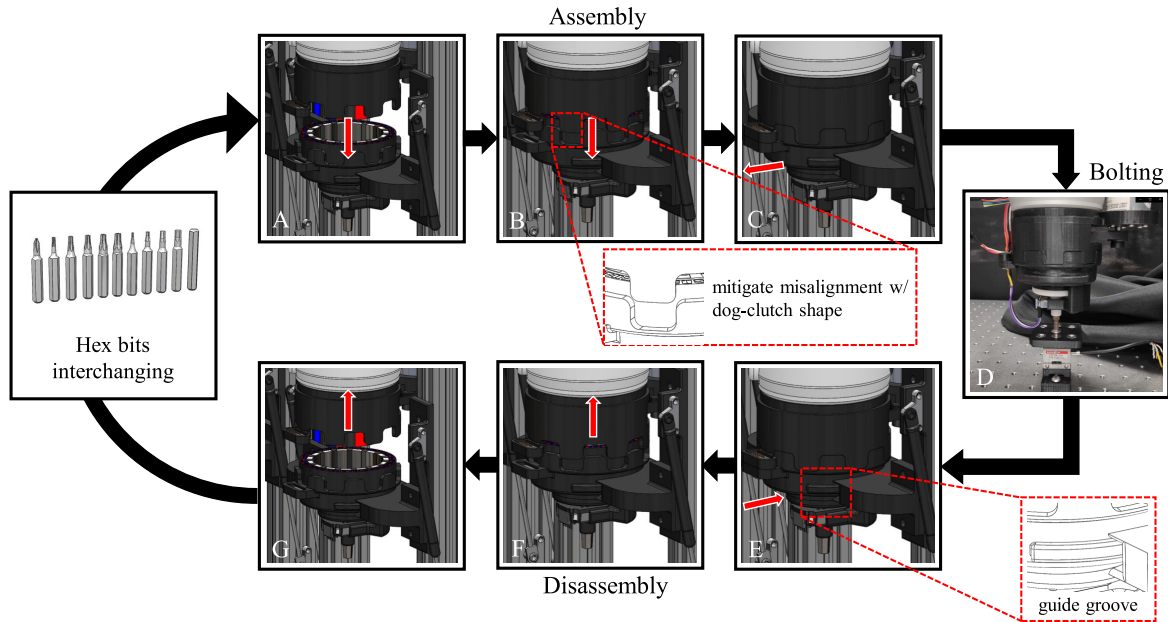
Overall assembly, tool operation, and disassembly procedures of proposed system.
